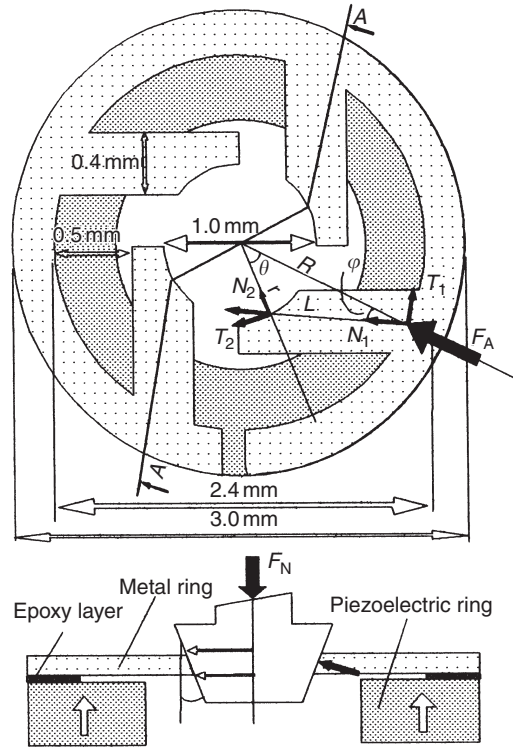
“Windmill” motor with a disk-shaped torsional coupler.
